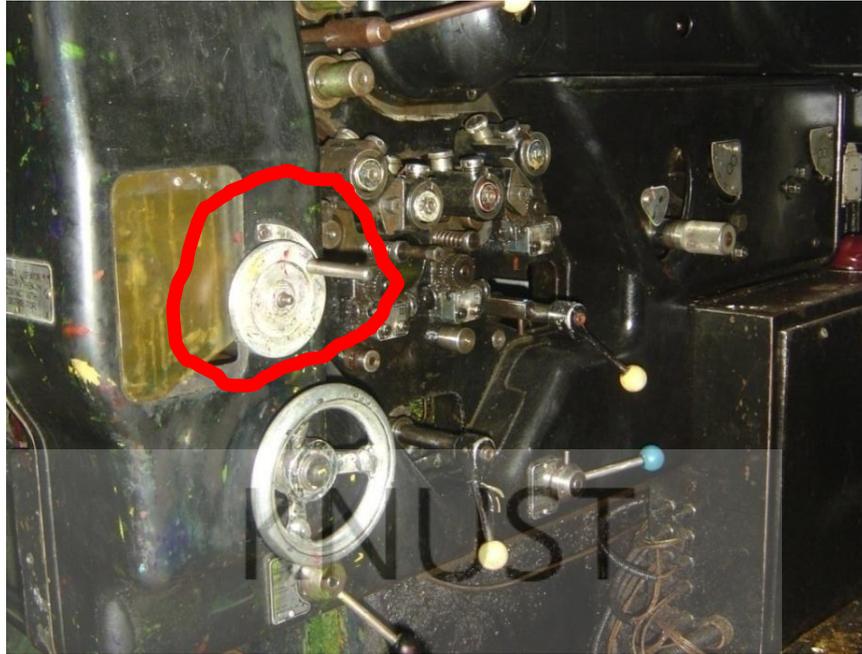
The Duct Roller Control Lever on Heidelberg Kord printing machine (*Highlighted by red outline*)
